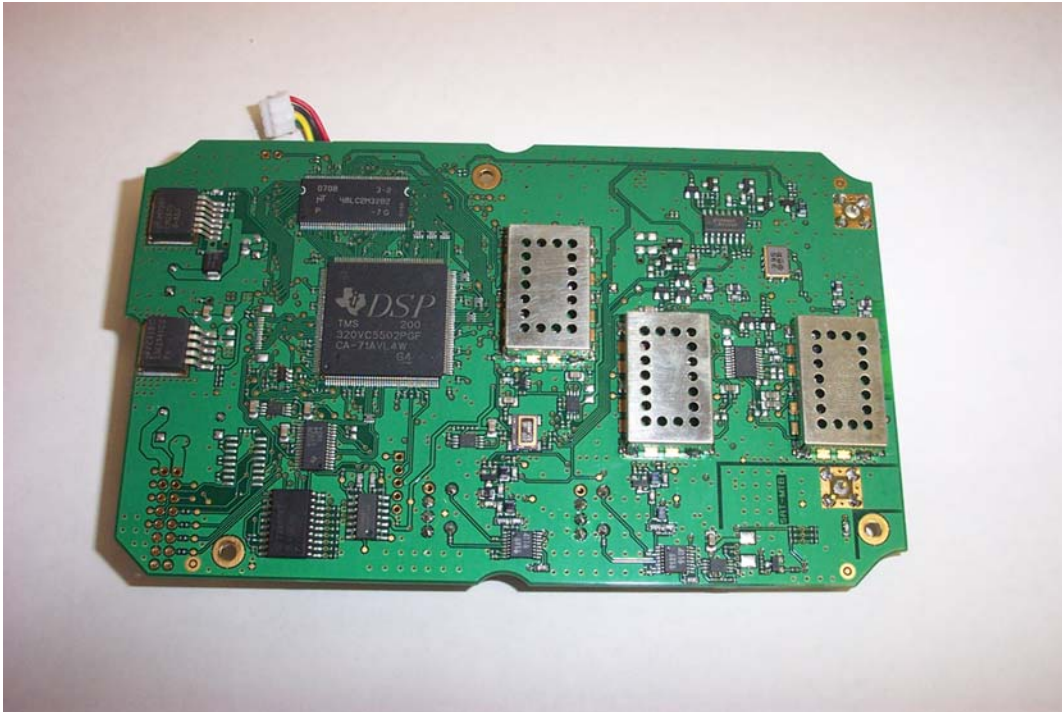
RF PCB DSP side; (this is the SRT PCB licensed to Navico)
